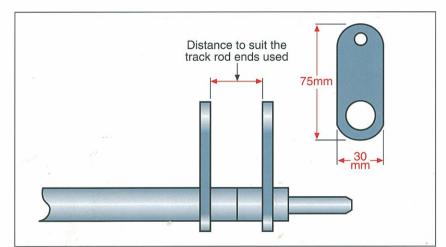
Steering column trackrod plates. The two plates need to be welded on to the steering column at a distance apart to suit the track-rod ends you are using.
